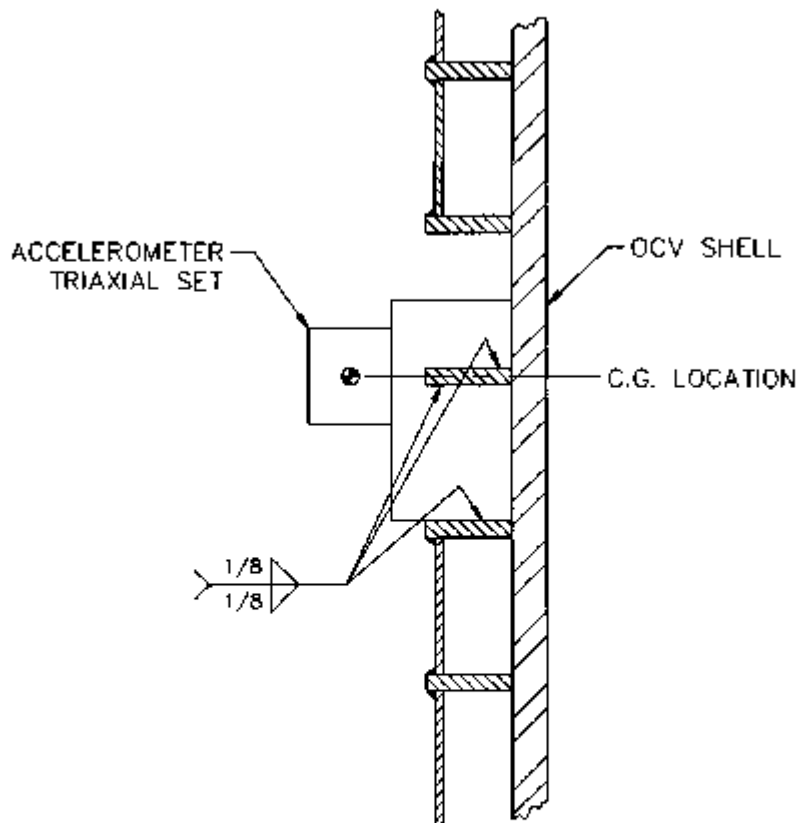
Active Accelerometer Mounting Block Details.
